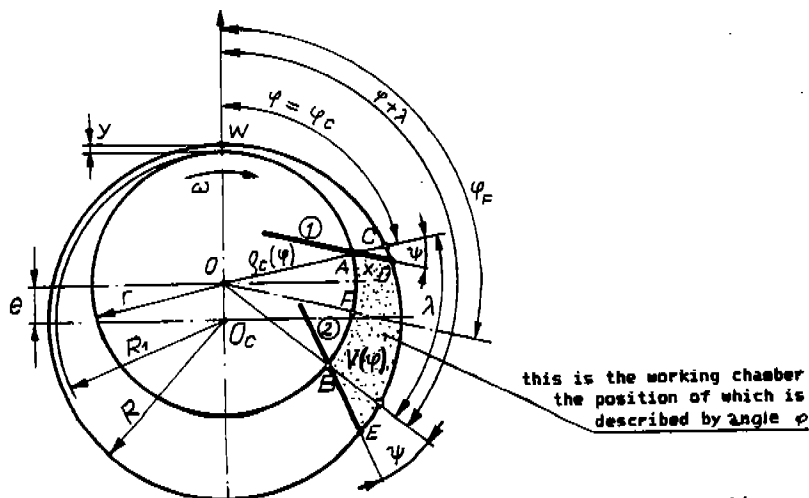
Cross-section outline of a multisliding-vane rotary machine
